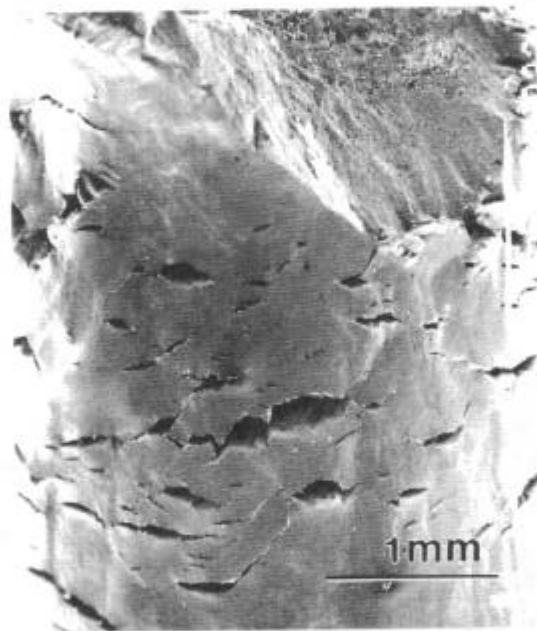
SEM image of HE cracks on the gauge surface of a weld-clad sample.
